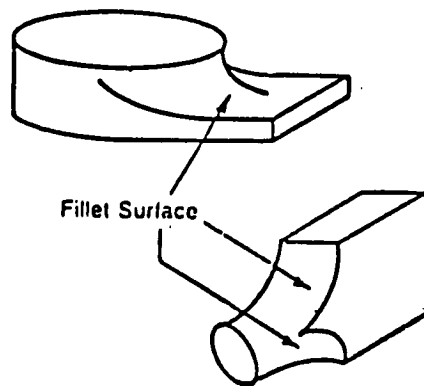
Fillet Surfaces between Circular and Rectangular Surfaces (see Knapp [1984], page 4)
